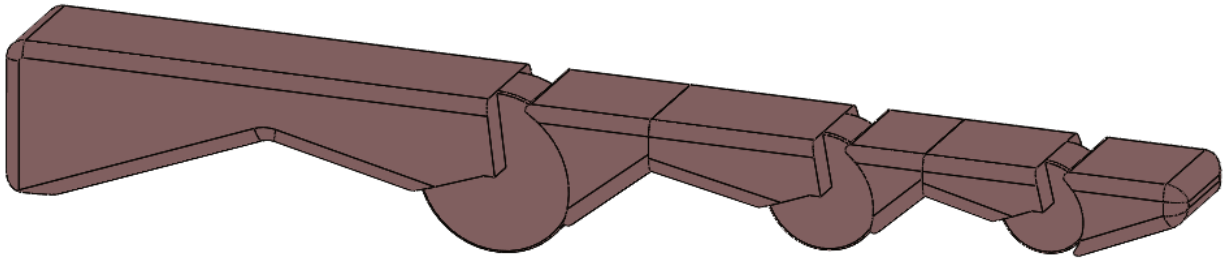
The design of the finger in SolidWorks showing only the components that belong to the shape design. Colors are as defined in Table 1.
